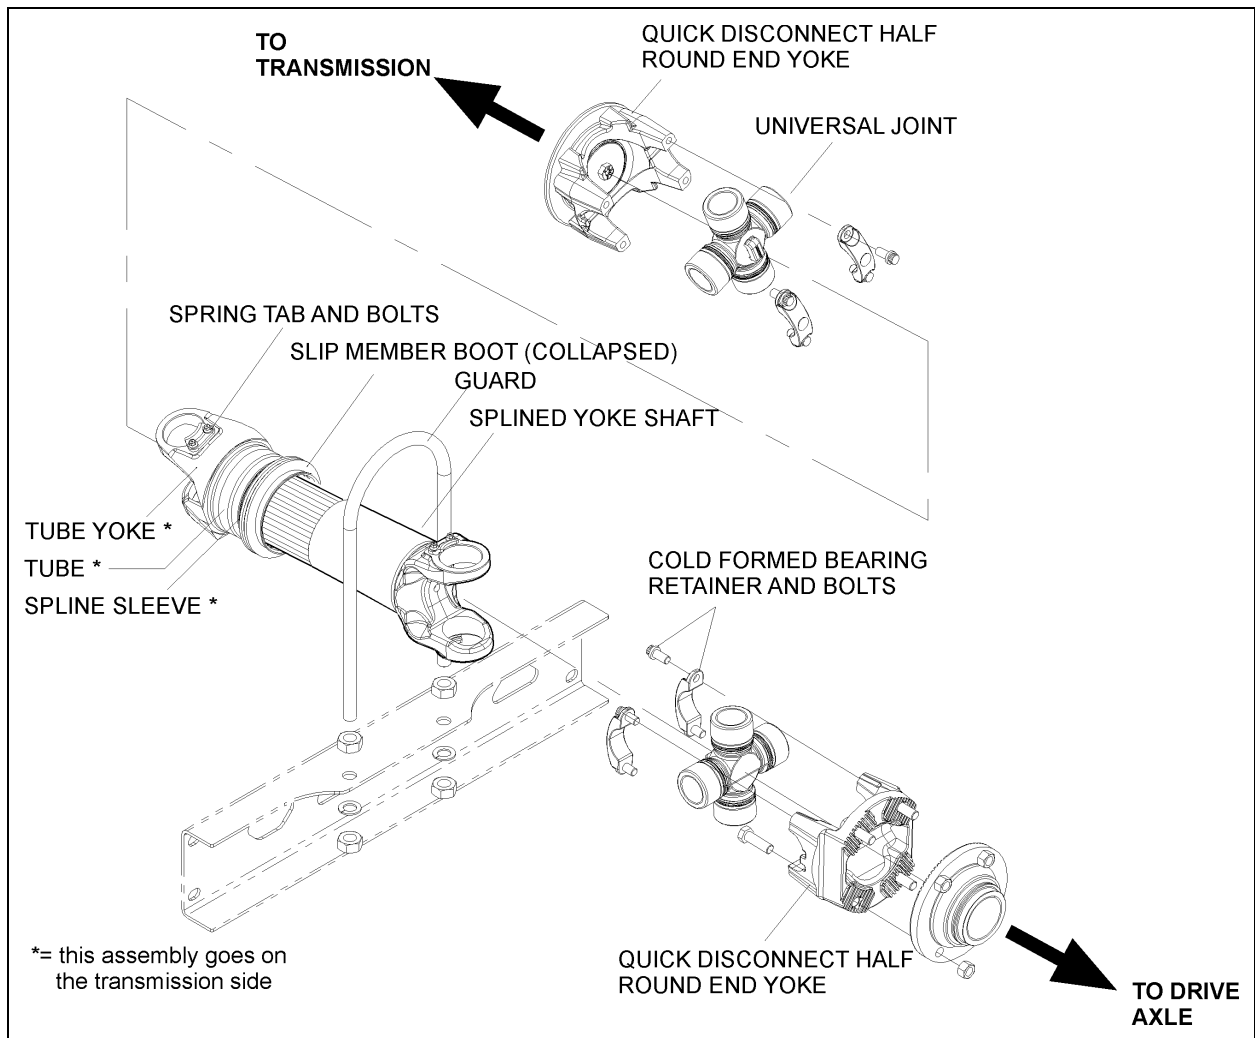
PROPELLER SHAFT ASSEMBLY DOB 2490-2789
